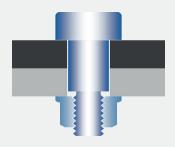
Through-bolted joint comprising shoulder-bolt and locking nut
